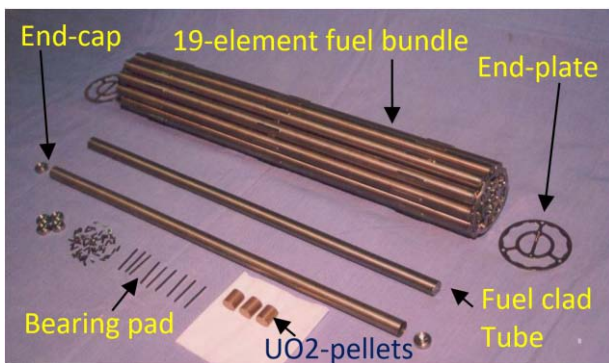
PHWR fuel bundle (19-element) along with various assembly components and fuel pellets.
